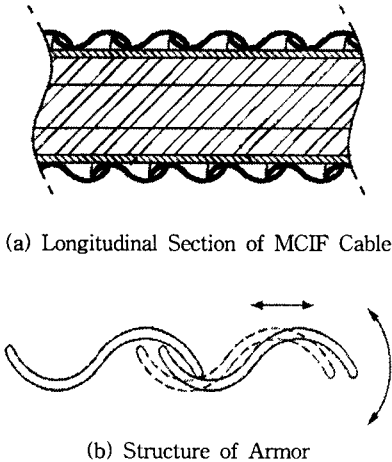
Sectional View of Aluminum Clad Flexible Cable
